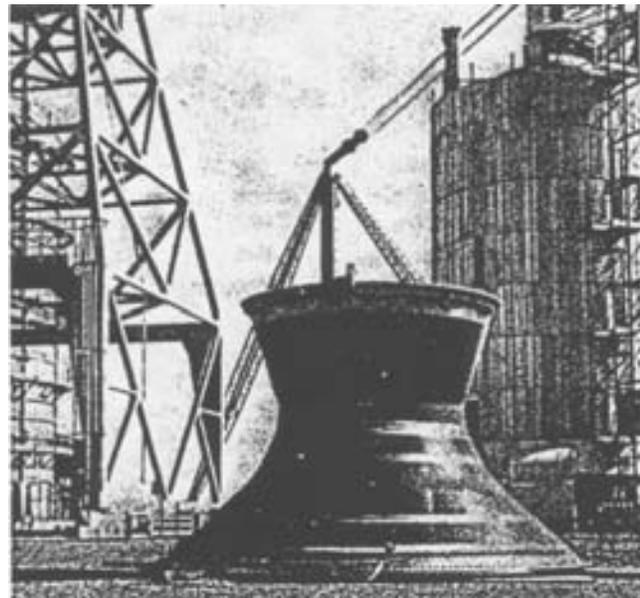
First all-welded 260 in. diam rocket motor nozzle shell
